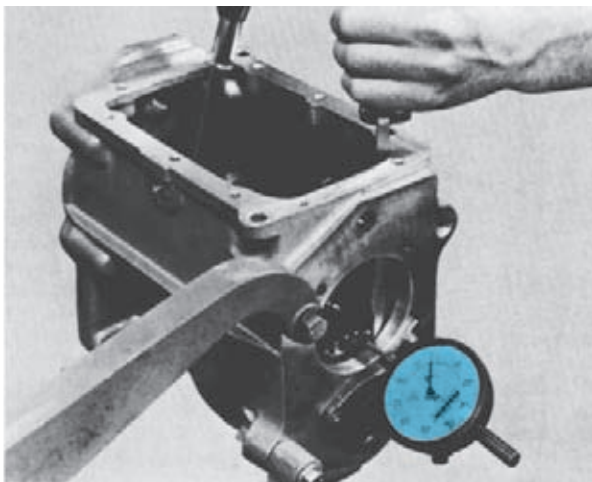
An alternate method is to mount a dial indicator at the front of the case with the indicator stylus on the cluster gear and parallel to the countershaft (Figure 8-97b). Move the cluster gear up and down and read the travel/clearance.
